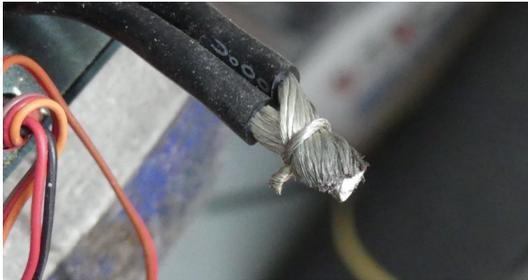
Initial setup to join two 8 AWG wires, binding wire can be trimmed later
